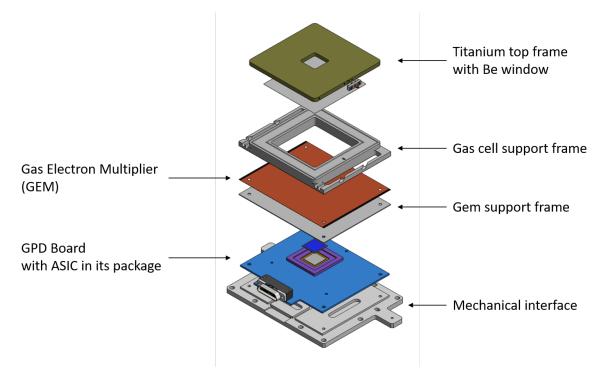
Exploded view of the GPD assembly showing all its components. A PCB board contains the ASIC and and is bonded on top of a mechanical interface. A ceramic support frame holds the GEM and is glued on the PCB, while another ceramic frame serves as a spacer for the absorption gap. The top of the detector is closed by a titanium frame with a thin beryllium window. The gas gap is filled with a DME-based mixture and sealed via a copper filling tube.
